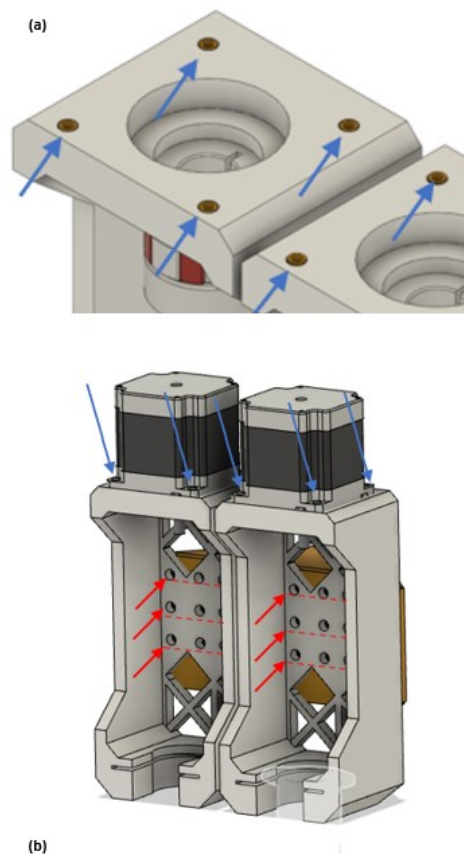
Main Housing: (a) Motor Mounting Area, (b) Bracket Connection to the Adapter Bracket
